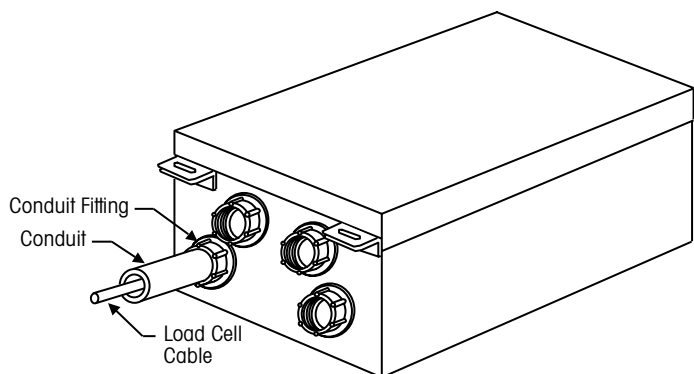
Large Analog Junction Box with Conduit Fittings
